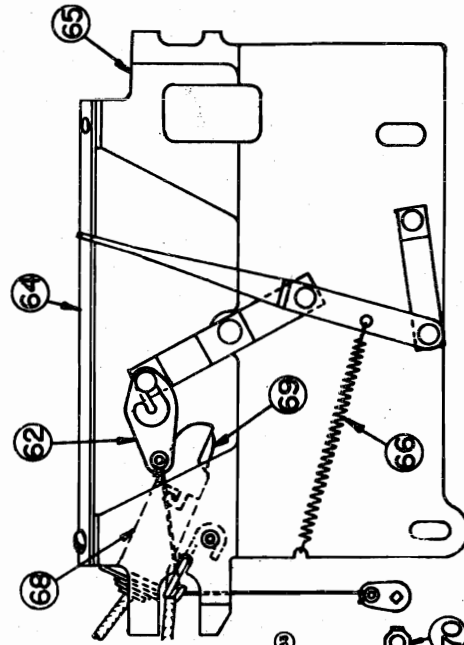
PARTS LAYOUT POINTNEL PLATE ASSEMBLY
